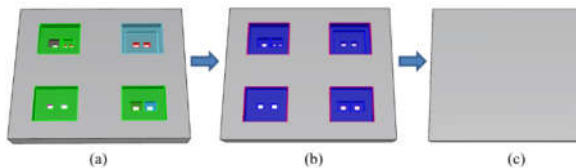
An example illustrating the removal of holes, (a) recognition of the holes, (b) related data recorded on each hole or hole structure, and (c) after all holes removed.
